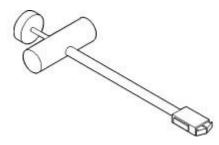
ADAPTER, VALVE SPRING - 8464 Courtesy of CHRYSLER LLC
